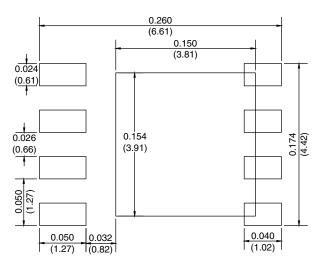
Recommended Minimum PADs for PowerPAK SO-8 Single Dimensions in Inches/(mm)
